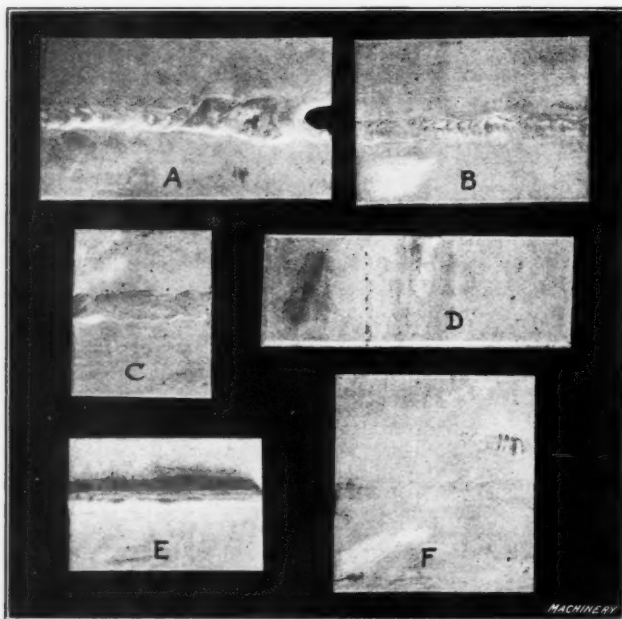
(A) Weld made by Beginner. (B) Fusion not Thorough. (C) A Good Weld on 0.048-inch Stock. (D) A Good Weld on 0.116-inch Stock. (E) Flanged Weld improperly done. (F) A Hammered Flanged Weld
